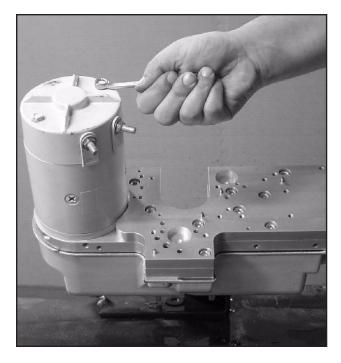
Using a 10mm wrench loosen the two motor mounting bolts.
